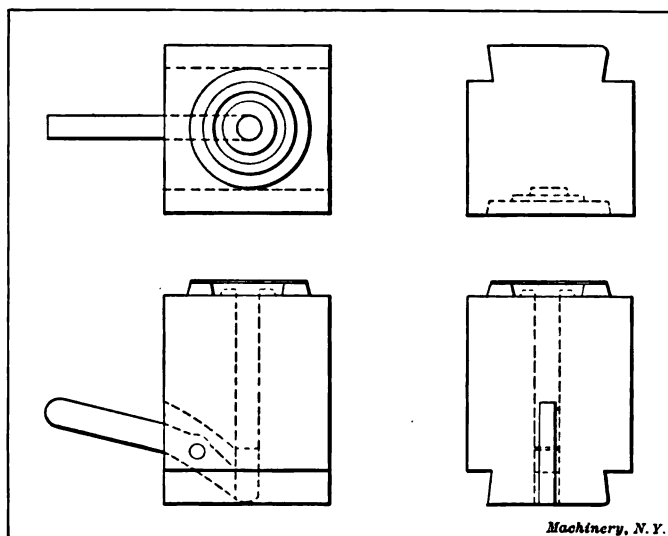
Upsetting Die for the Second Operation in Forging the Cam-shaft
